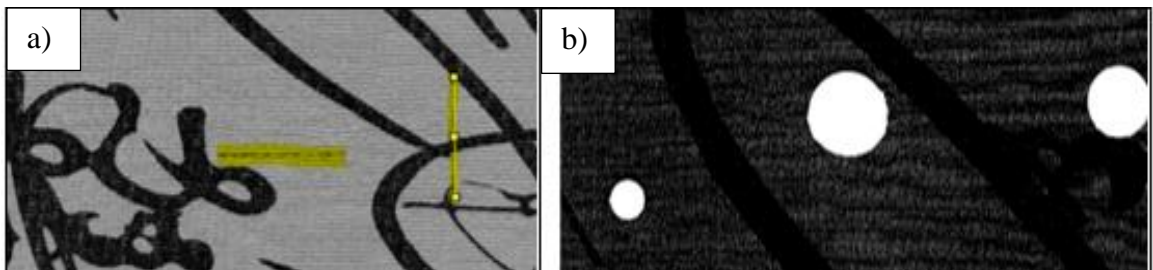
F2 for four-point analysis a) colour defect; b) hole defect
